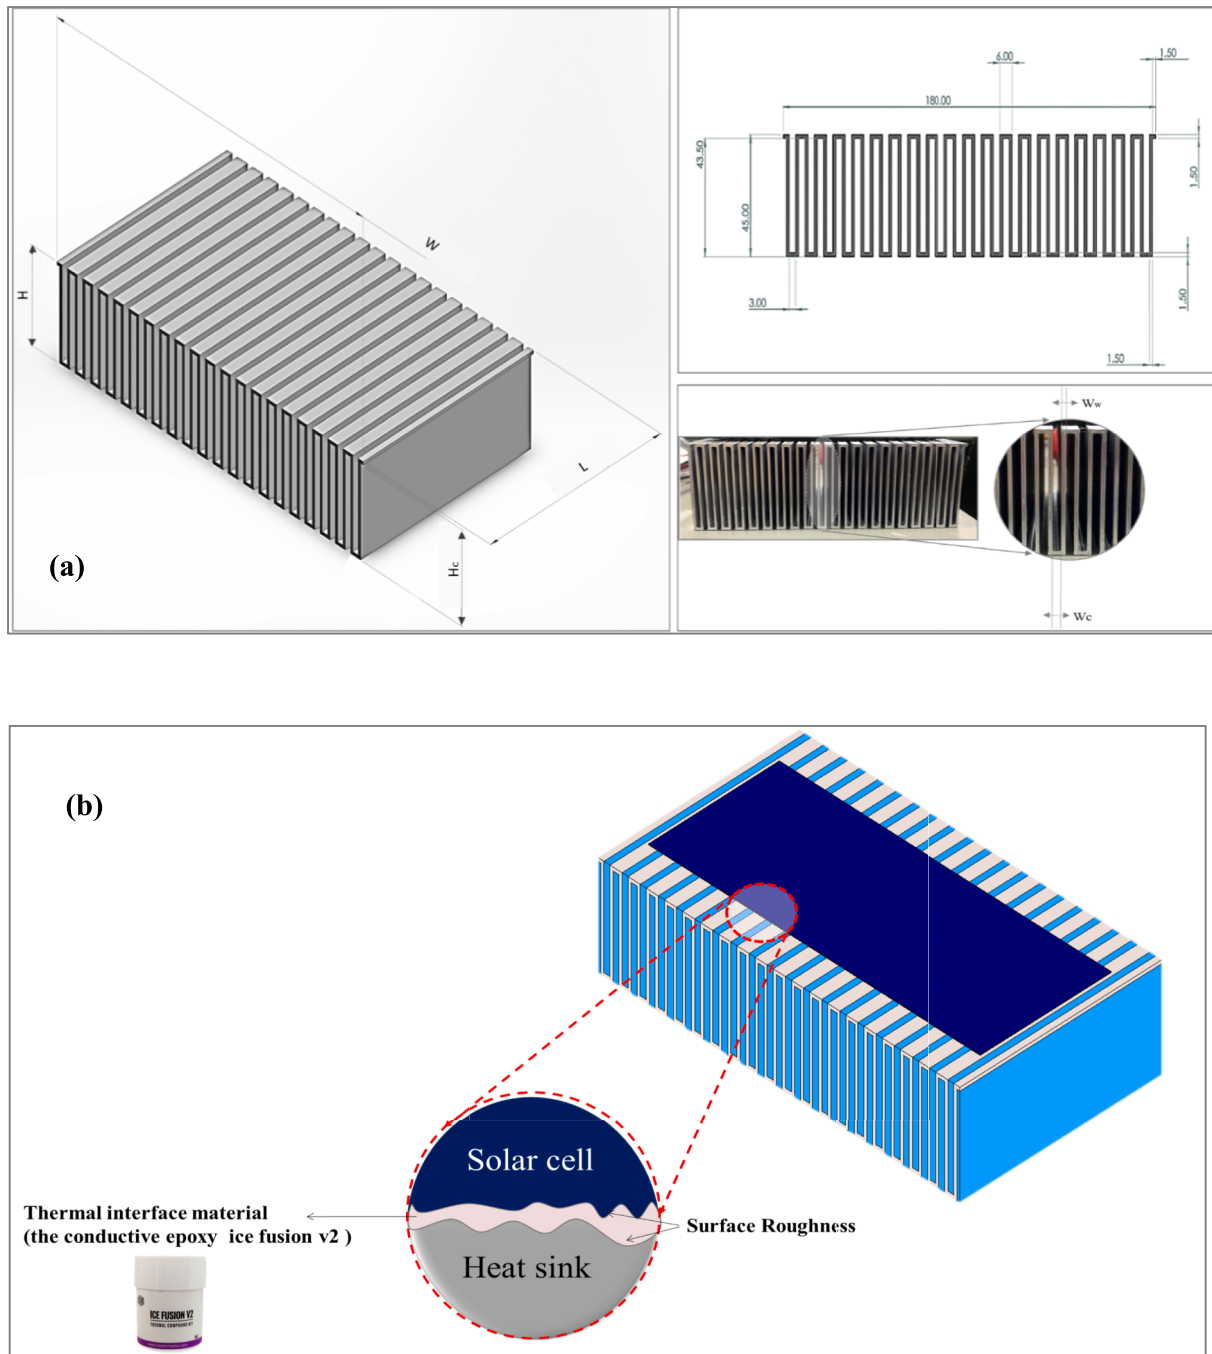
(a) 3D and 2D views of the folded mini-channel heat sink with main dimensions, (b) schematic vision of the surface roughness interface.
